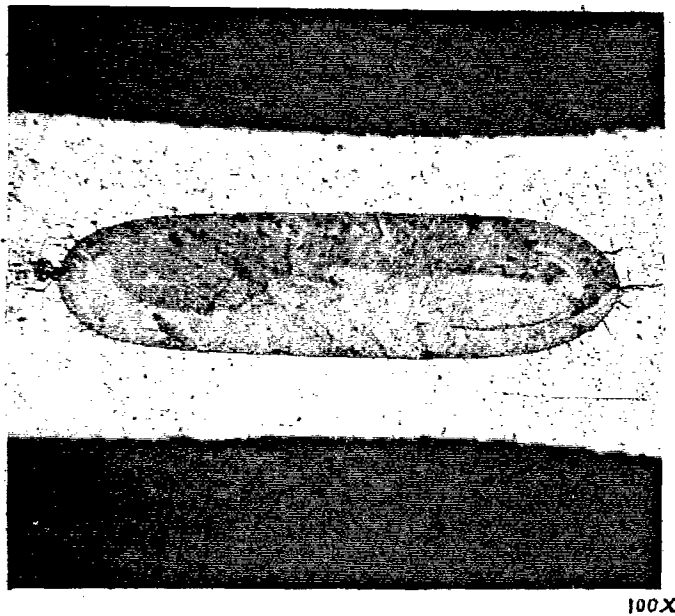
Resistance Seam Weld Cross Section
